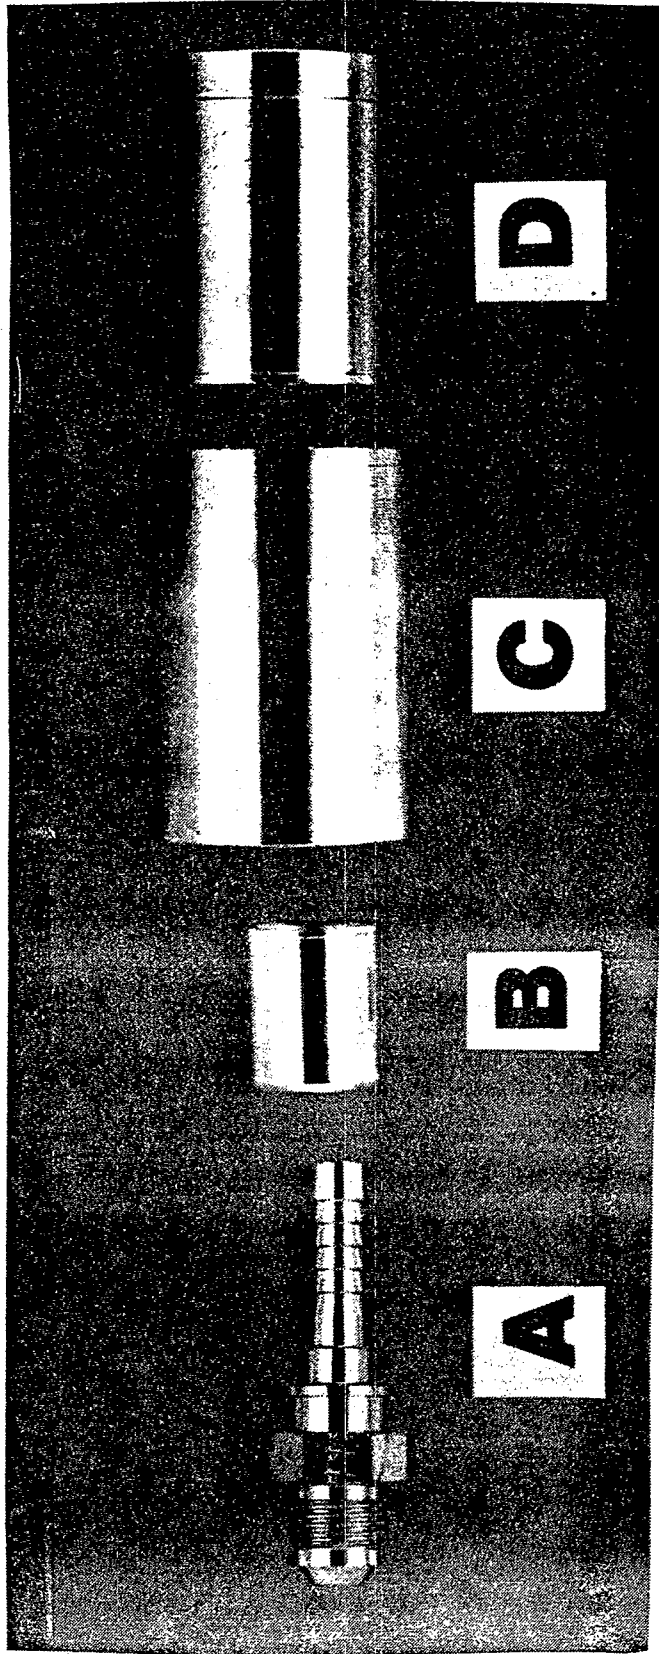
Zinc-plated parts salt-spray tested by Aeroquip (barrel plated).
